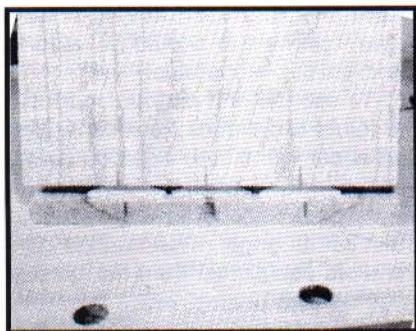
Dry assemble all pieces to make certain they fit properly.
